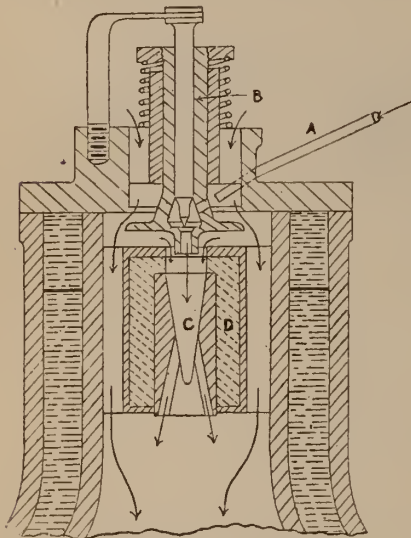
Section through vaporiser and combustion chamber of Teoh & Co.'s "Capitaine" Engine.
